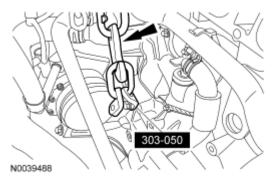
Identifying Special Tool (303-050) Courtesy of FORD MOTOR CO.
